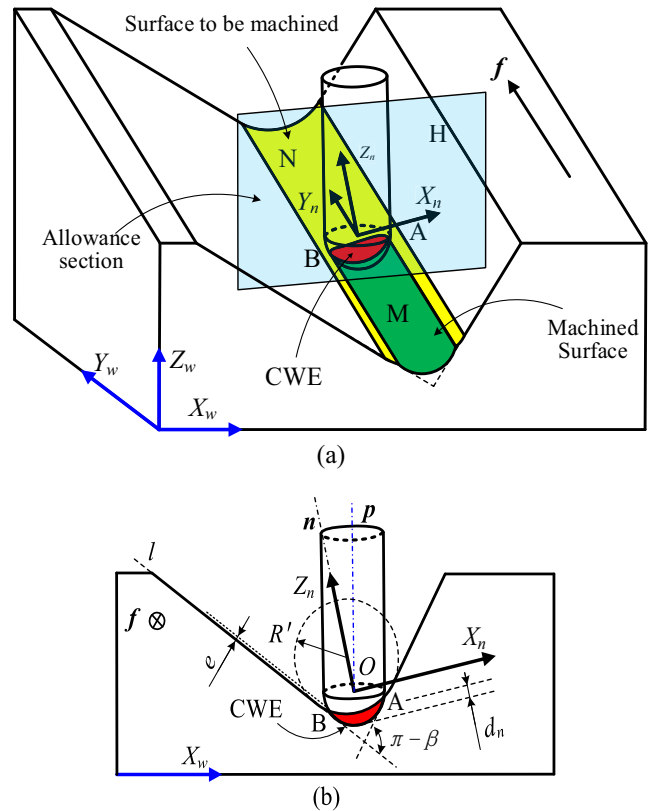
The CWE of pencil-cut machining of ball-end mill. a 3D graph. b Y_n -axial view
